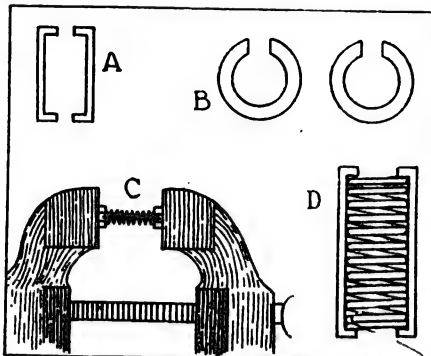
Practical Suggestion for Compressing Valve Springs.
